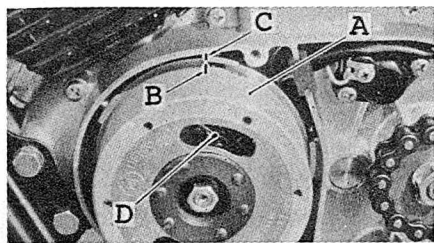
Point gap may be set by reaching through hole (D) in flywheel (A). Timing marks (B&C) will align when crankshaft is in correct position for ignition.
